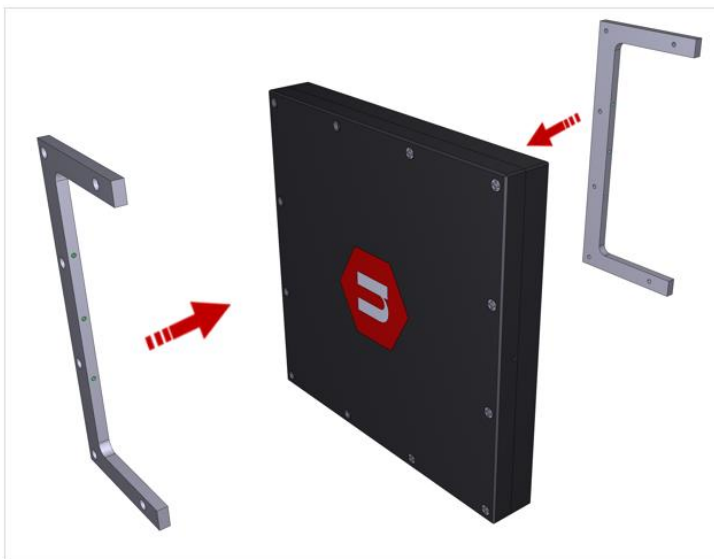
Assembling tools for SP5622 – Detection System.
